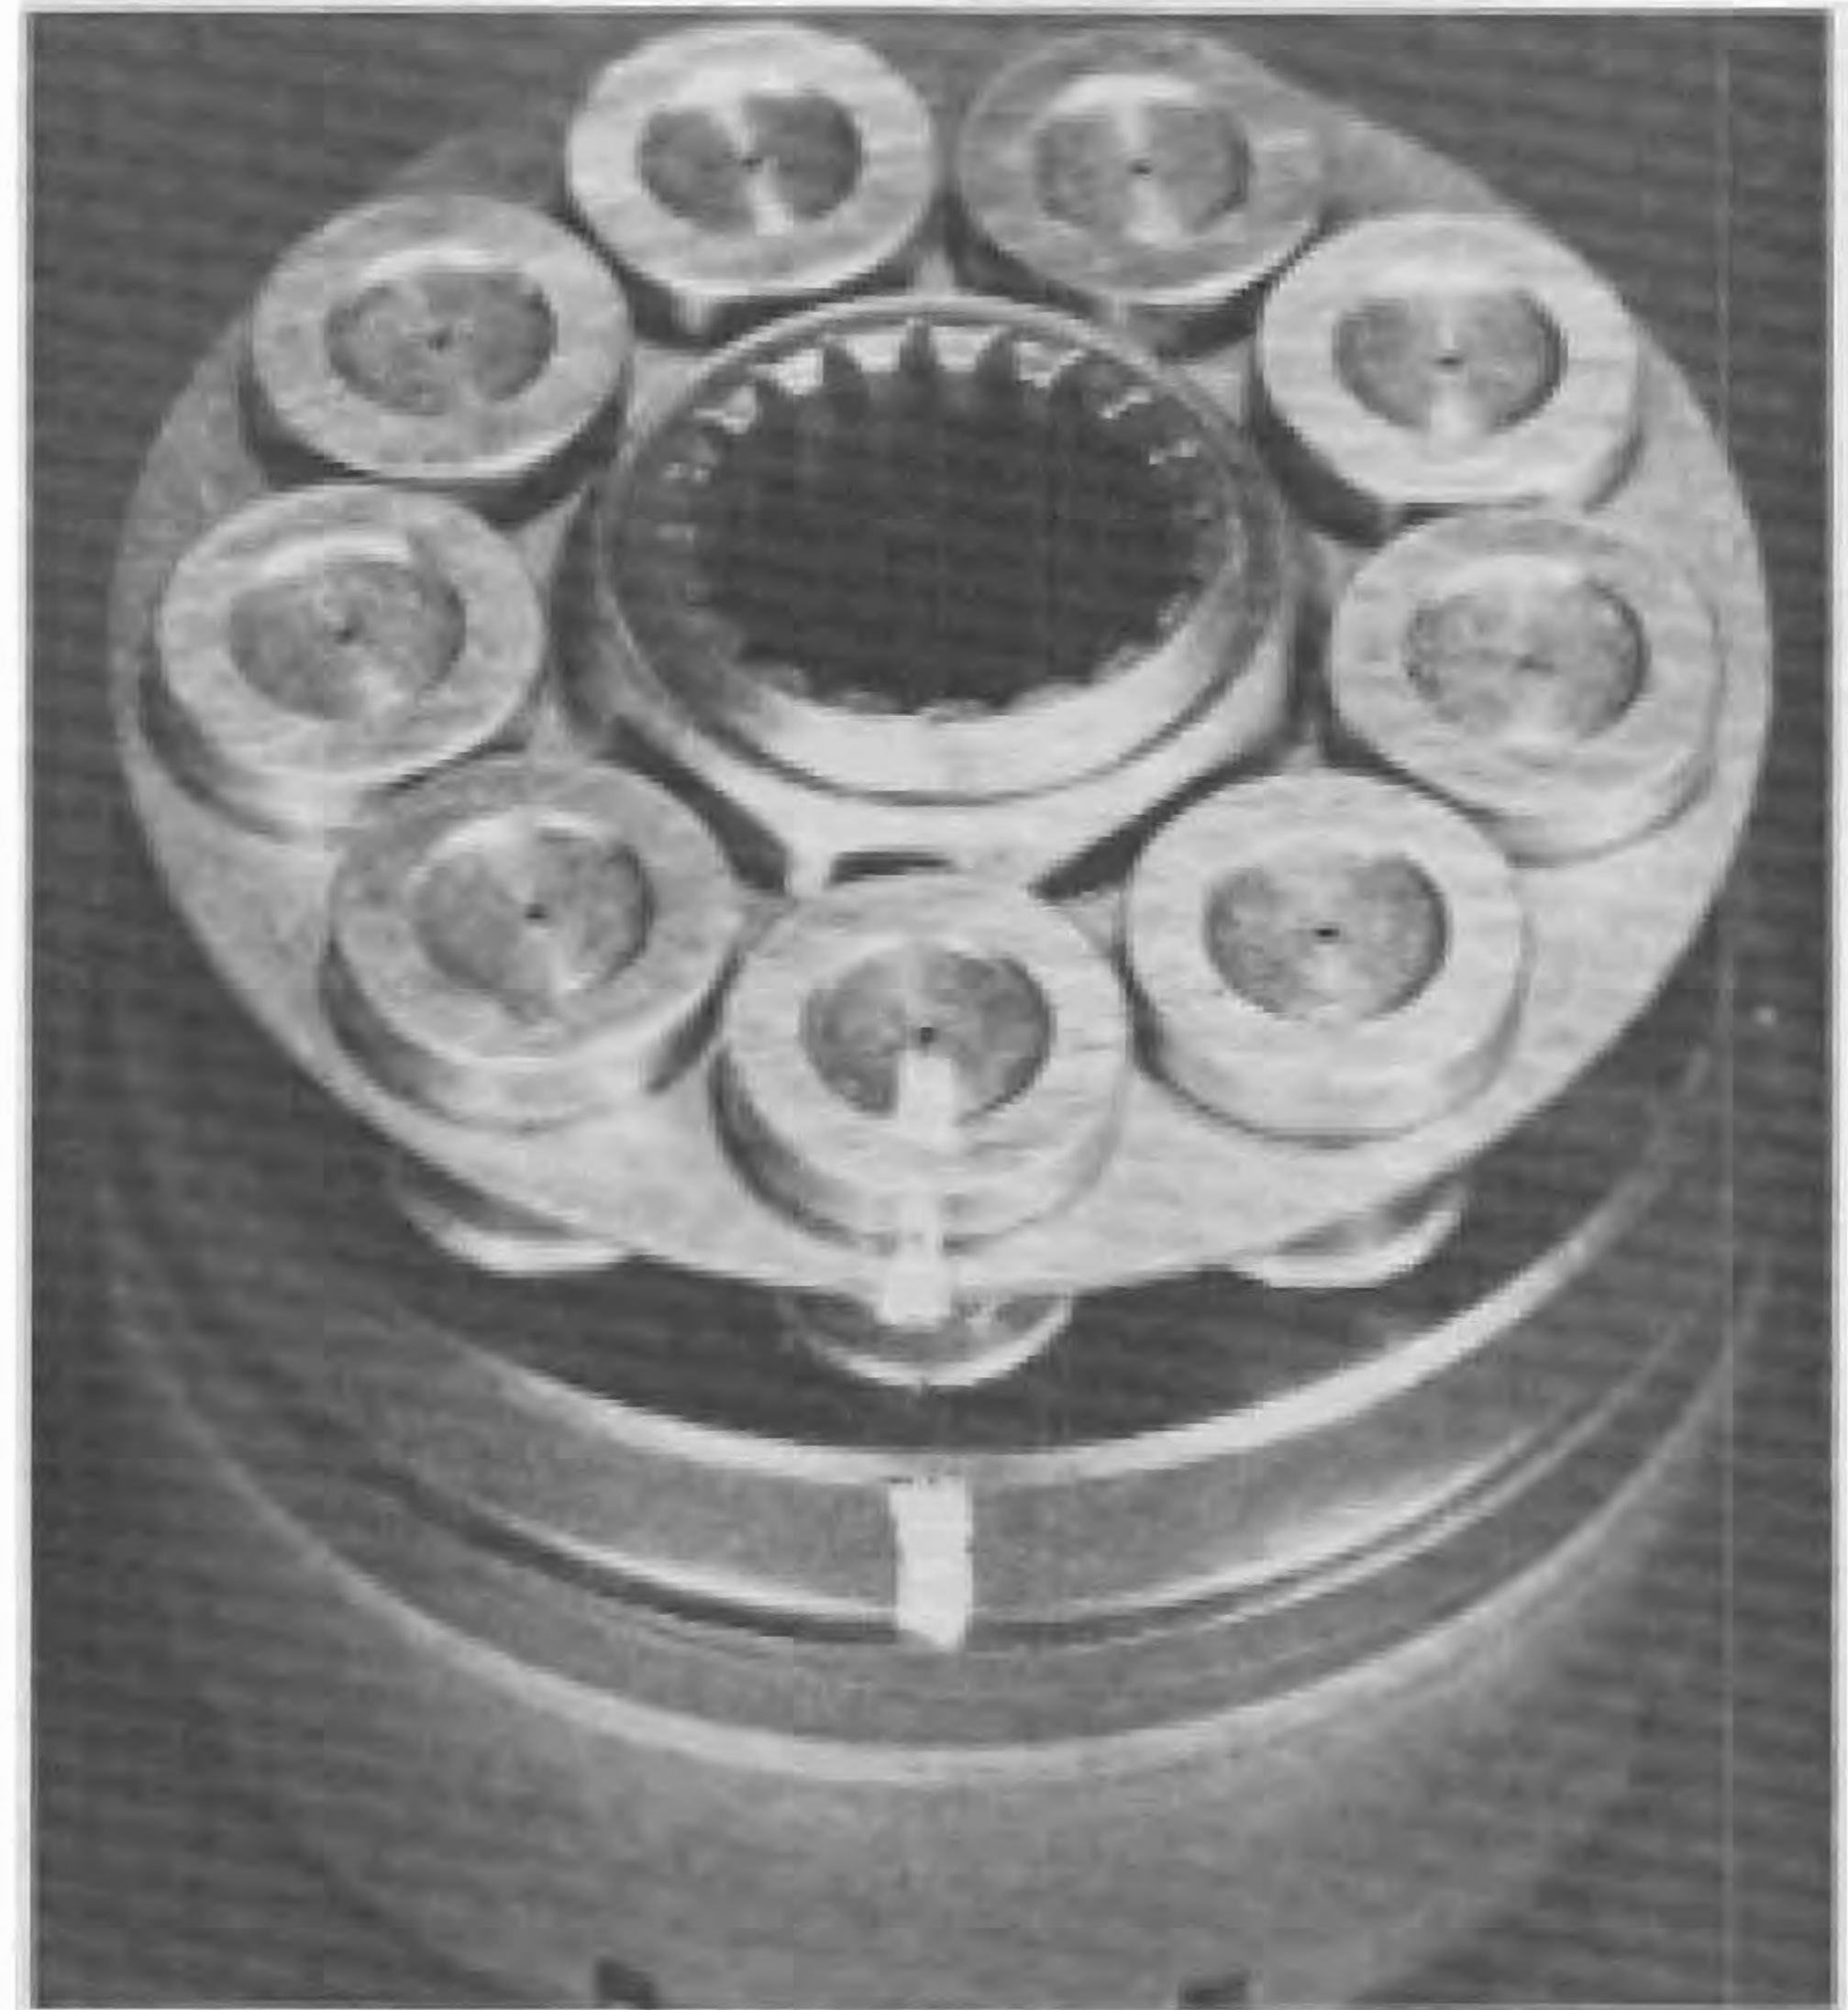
Before removing Piston, Mark both Piston and Cylinder Bore with Tape
